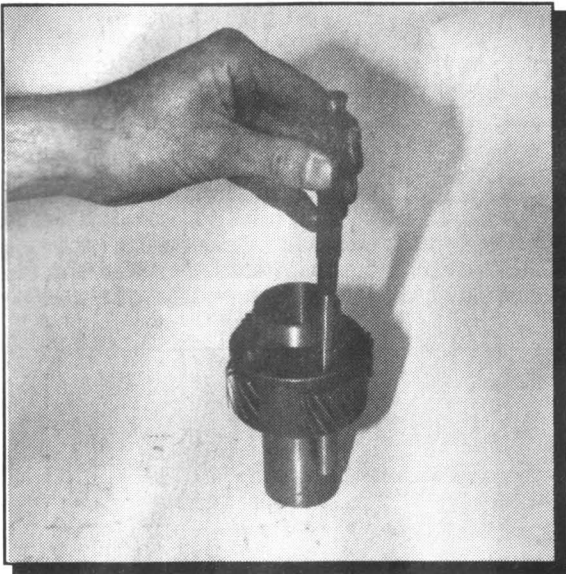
Planetary gears & bearings may be replaced by driving out the pins. It is not necessary to remove the roll pins locking them in place. They will shear as the pins are driven out. New replacement units do not use the split pin design. To keep pins in position, we use a 2-piece retainer ring that fits underneath syncro teeth. (See Fig 7A below).
